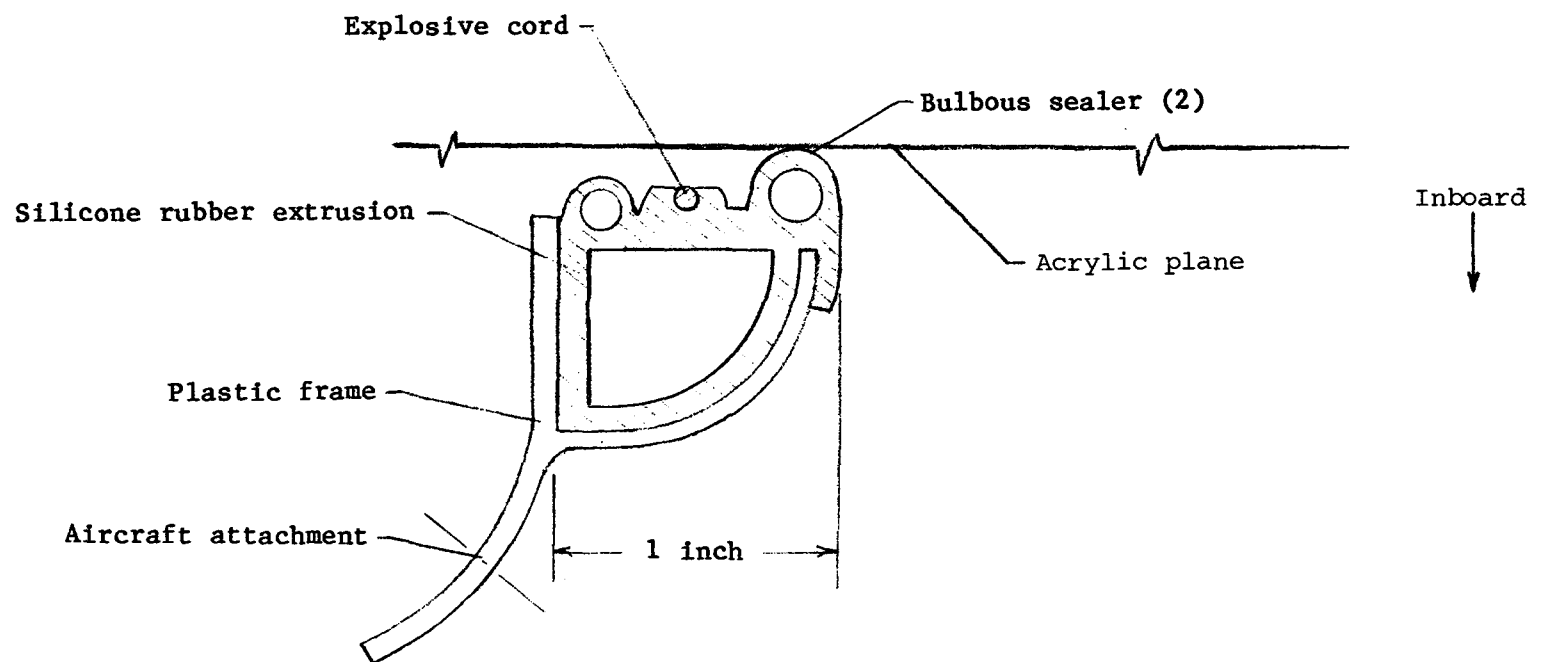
Cross section of window cutting assembly, showing the explosive cord, silicone extrusion and plastic frame.
